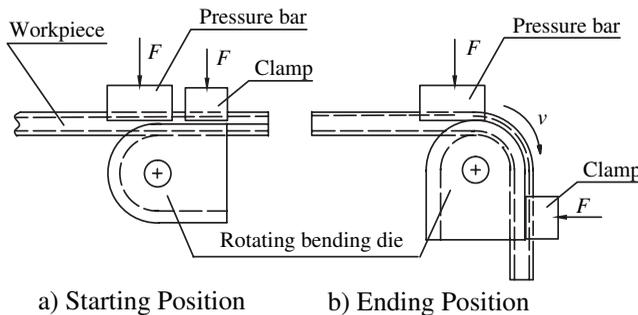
Rotary Draw Bending: a) Starting Position; b) Ending Position
